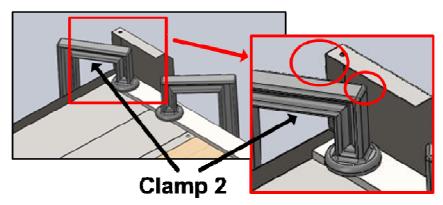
Bend #6- When clamping the Bending Bar down make sure to position the clamps to ensure that the work piece will not make contact with the clamp in the circled areas in the figure above.
